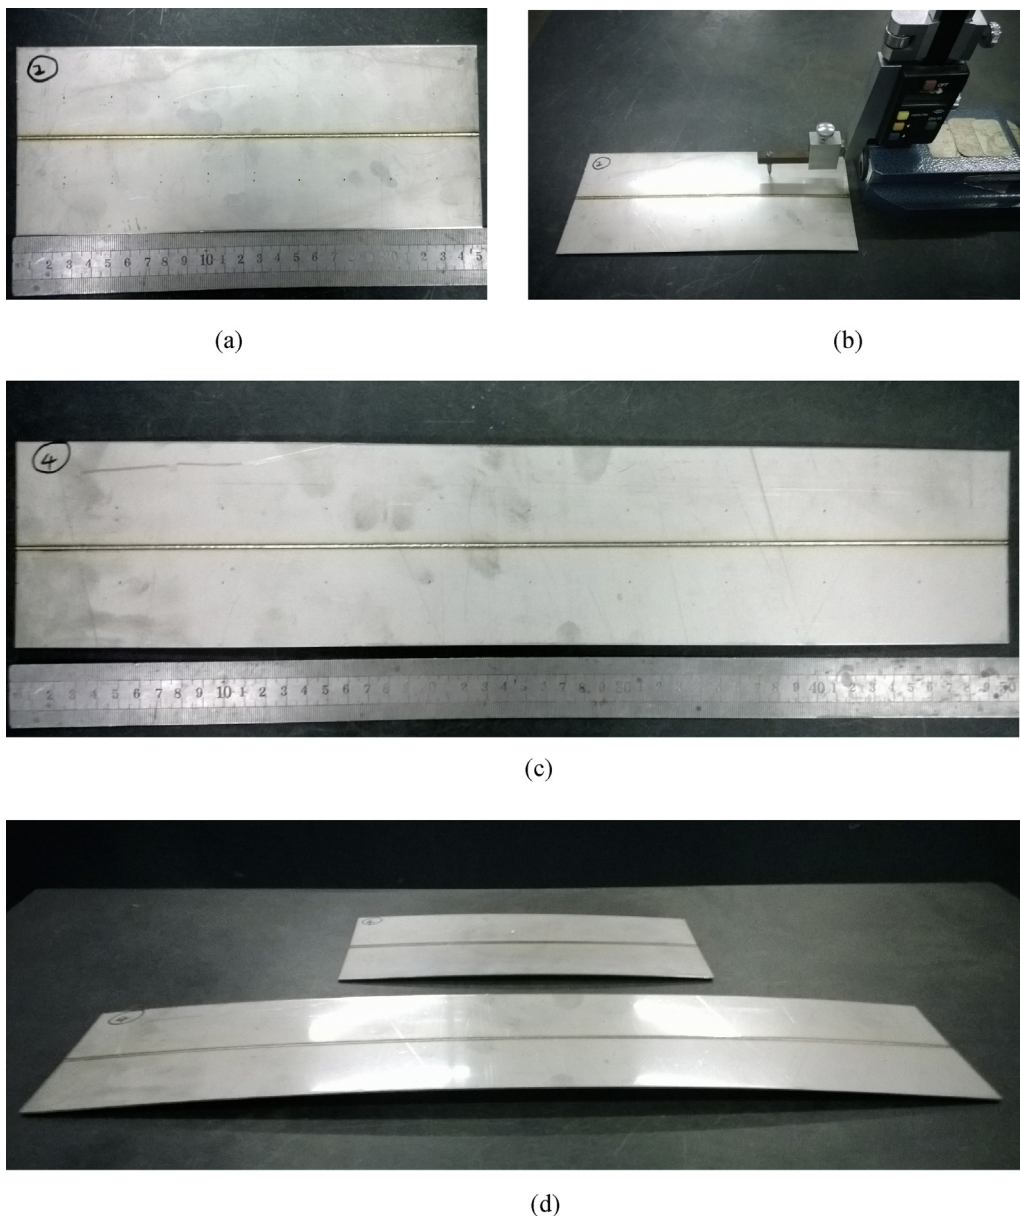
Laser welded specimens: (a) Specimen-2, (b) measurement of coordinates by altimeter, (c) Specimen-4, and (d) deformation view of test specimens with different lengths.
